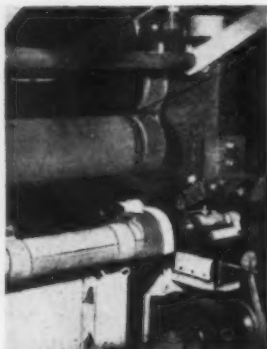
Scarfing unit. At right is one milling cutter. Reels at top wind ribbons cut from edge.
